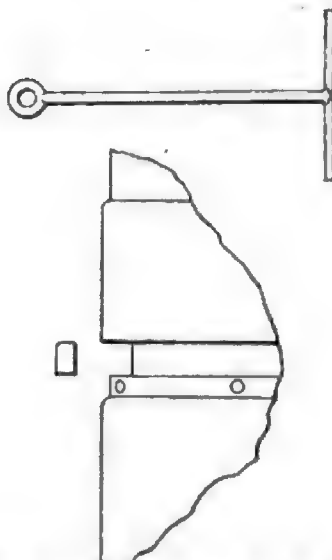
The tool at the top can be used for lapping the pistons and rings. At the bottom is illustrated the preparation of piston and ring to prevent oil going into cylinder
